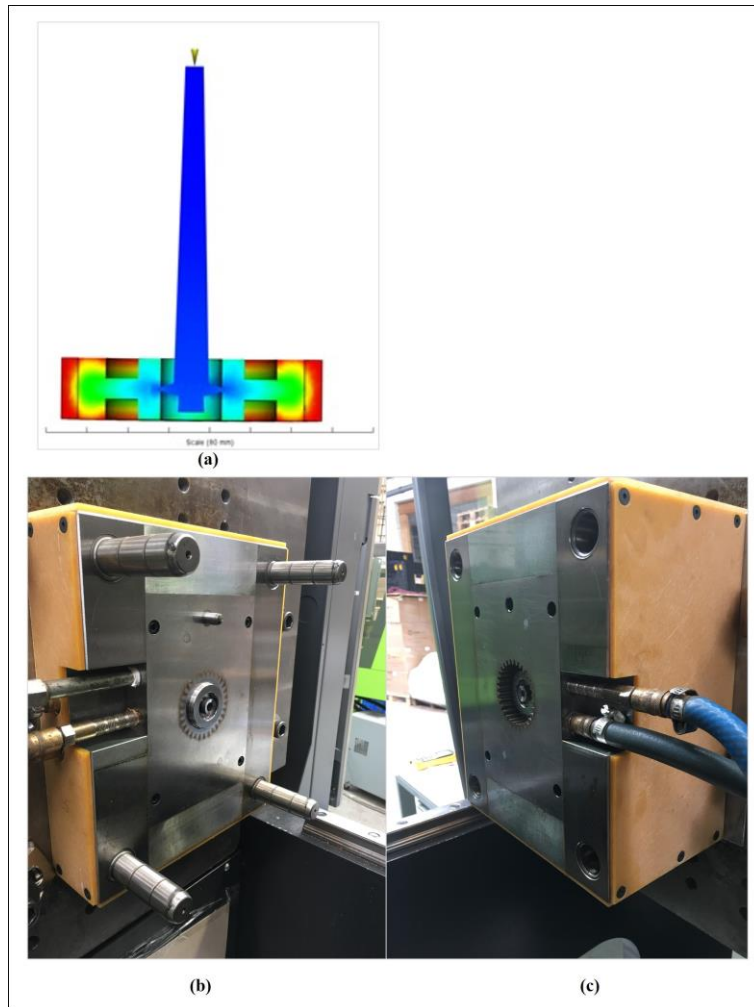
(a) Gear cross section from Moldflow. (b) and (c) Gear moulding tool.
